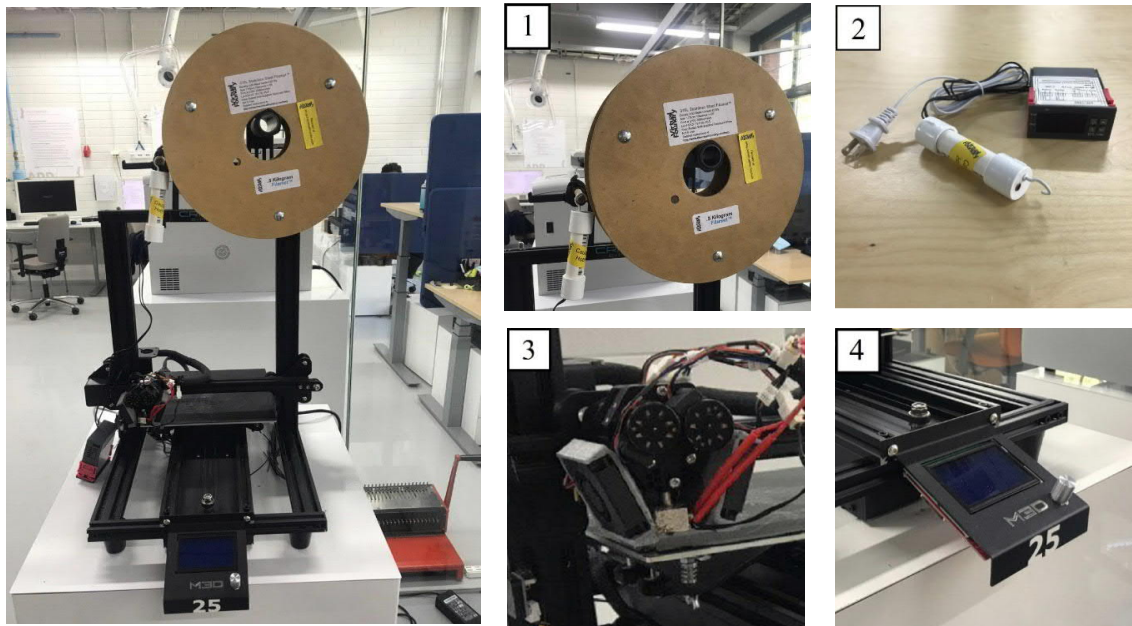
The images of Crane Quad 3D printer. 1) Filamet™ roll, 2) warmer, 3) nozzle setup, 4) setting controller.
